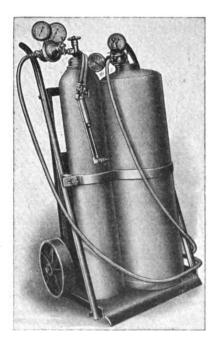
Portable Welding or Cutting Oxy-Acetylene Unit Courtesy of Davis-Bournonville Company
